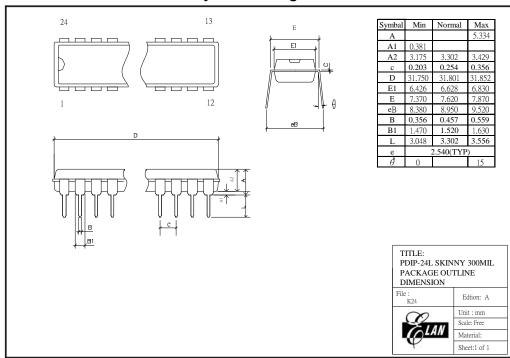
EM78F644/544N 24-Pin Skinny DIP Package Type
